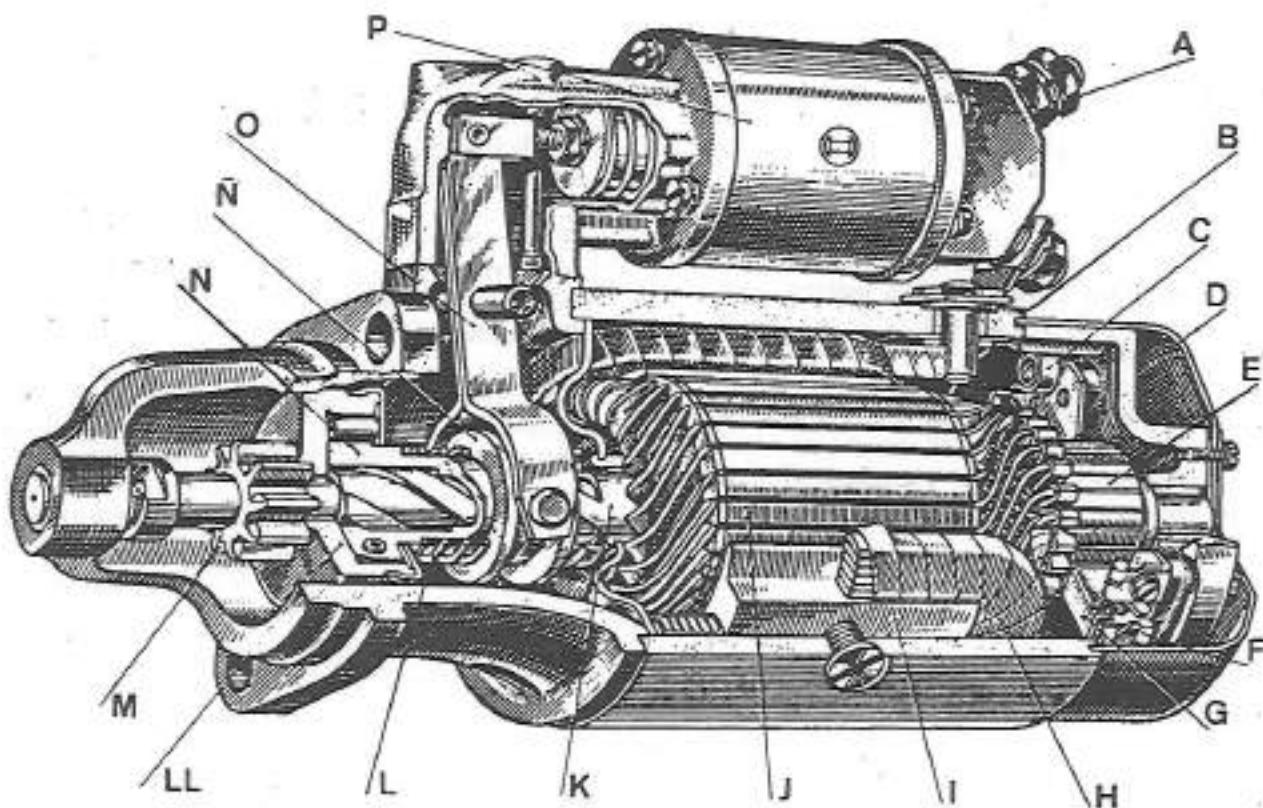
Cross section view of the mixed system starter with thrust gear and bendix
